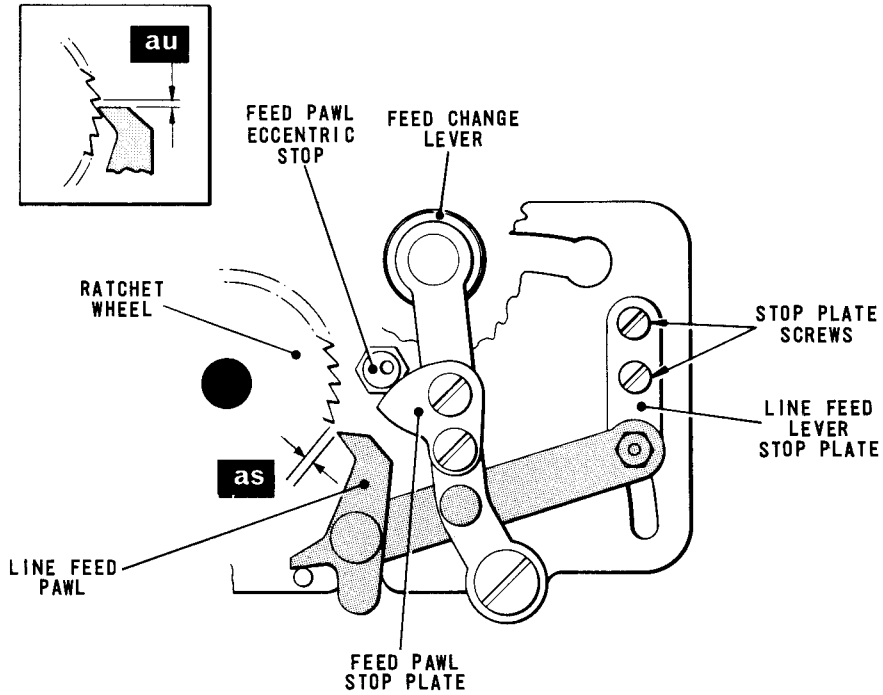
LINE FEED RATCHET WHEEL MECHANISM
